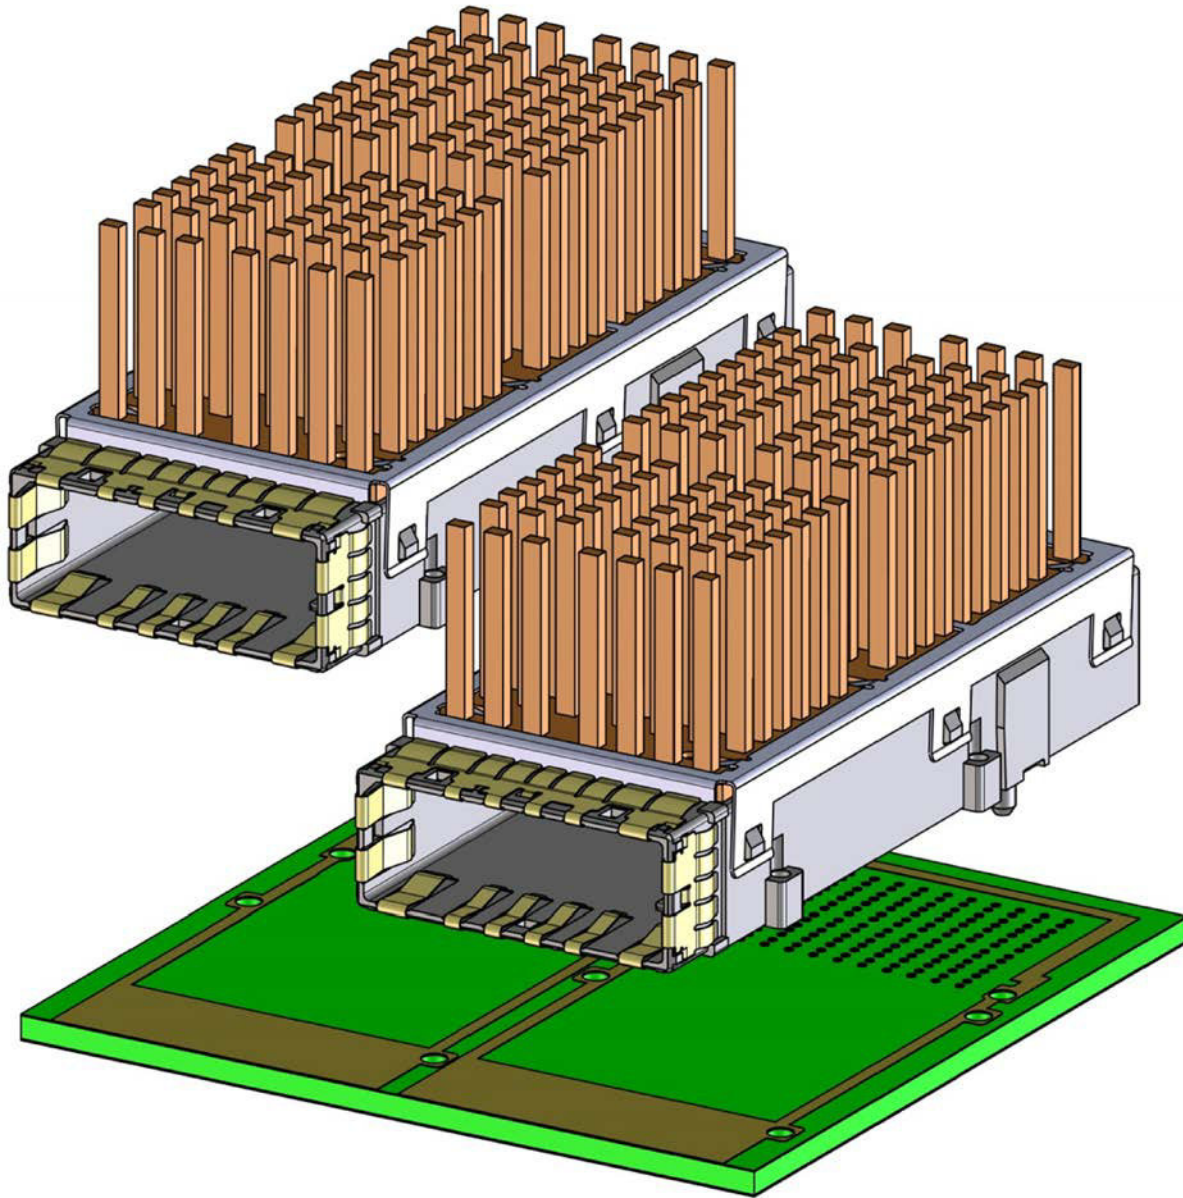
Style 2 Cage and Optional Heat Sink Design (exploded view)
